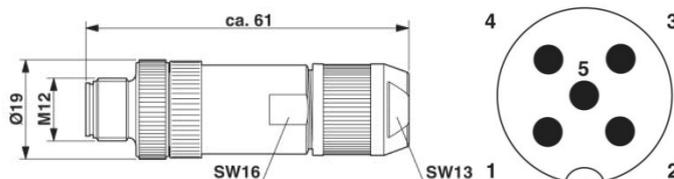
Sensor plug M12 x 1 straight, shielded; pole arrangement: male M12, 5 pins, A-coded, view of
